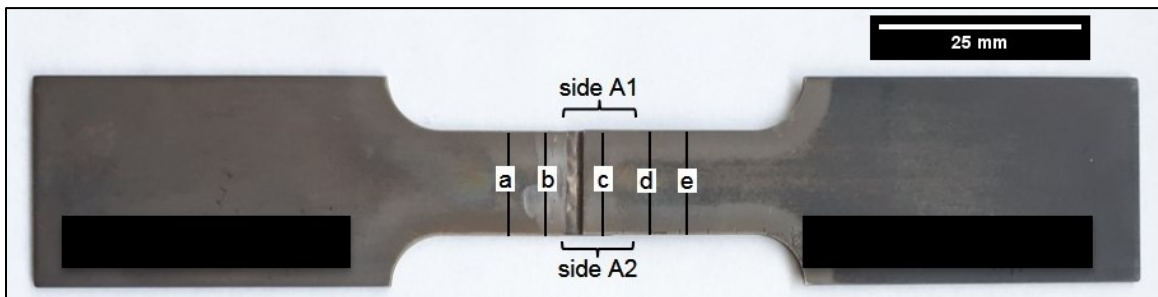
Single lap shear test specimen prior to testing showing location of named features used later in the work.
